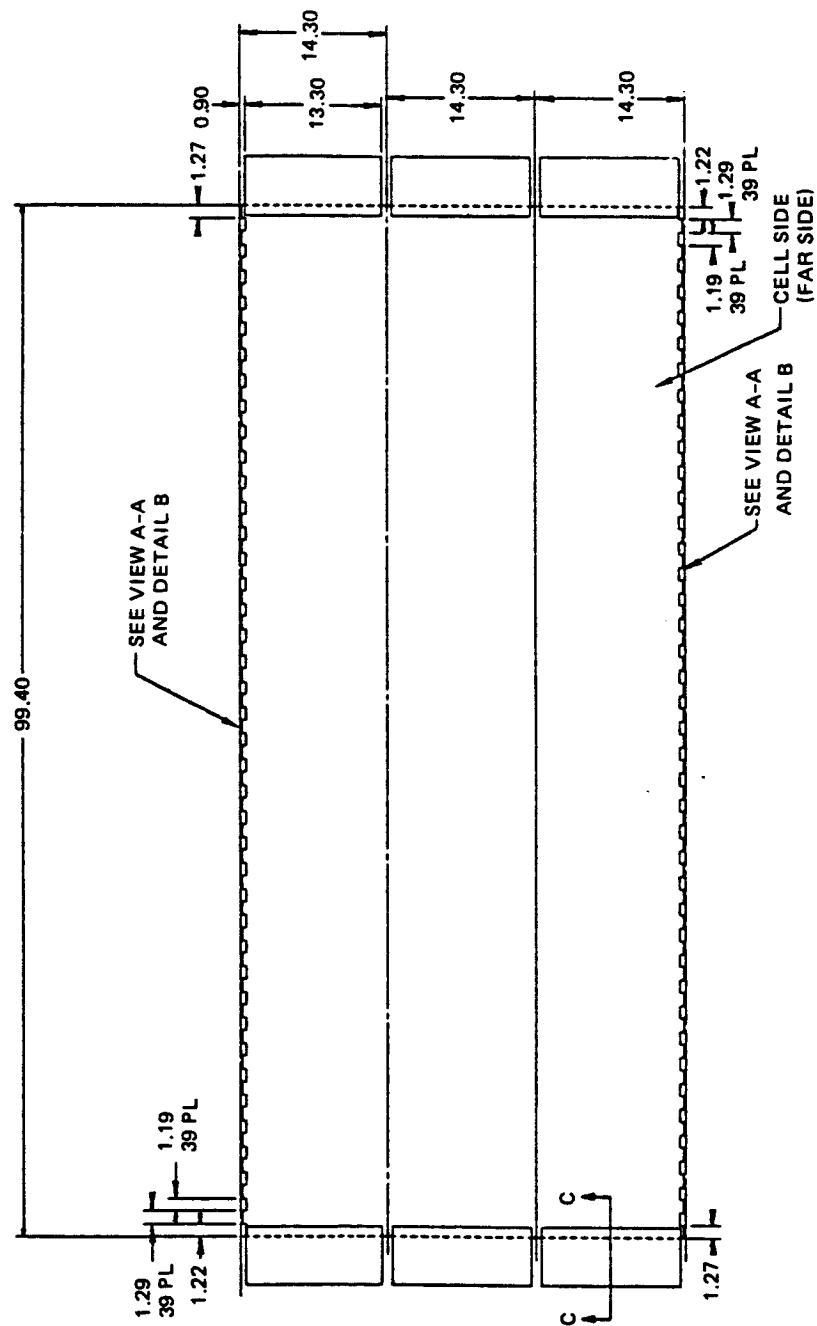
Flexible Blanket Solar Panel Assembly (SPA) Substrate
